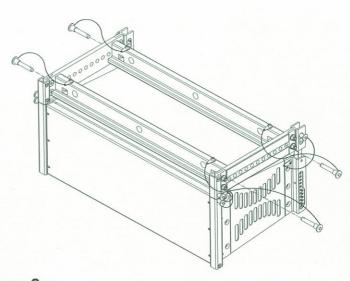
XLD GRID and XLE GRID Rigging Assembly
